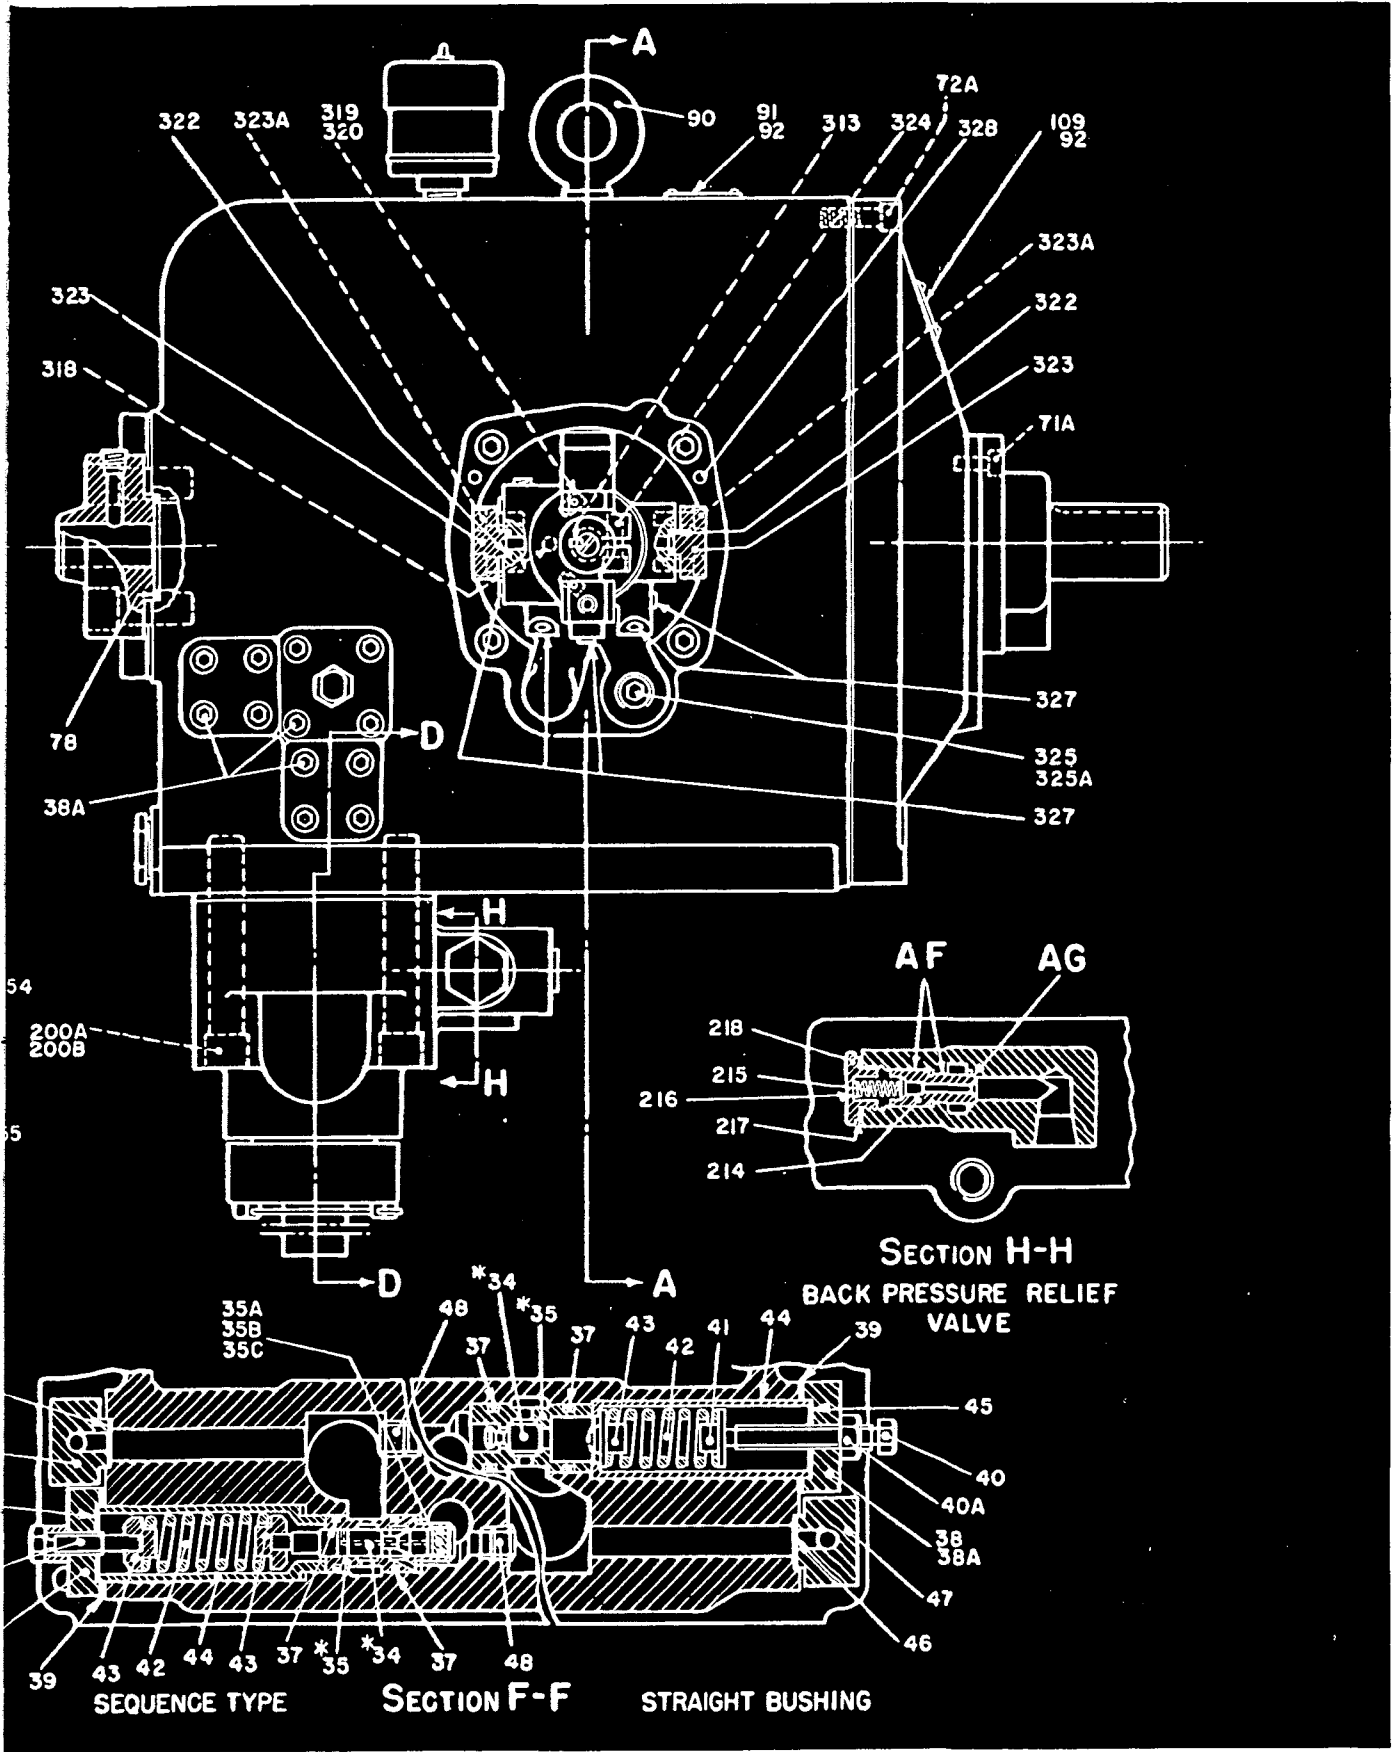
Parts Drawing of Type "DH" Pump (also see Figs. 12 and 14) (See
